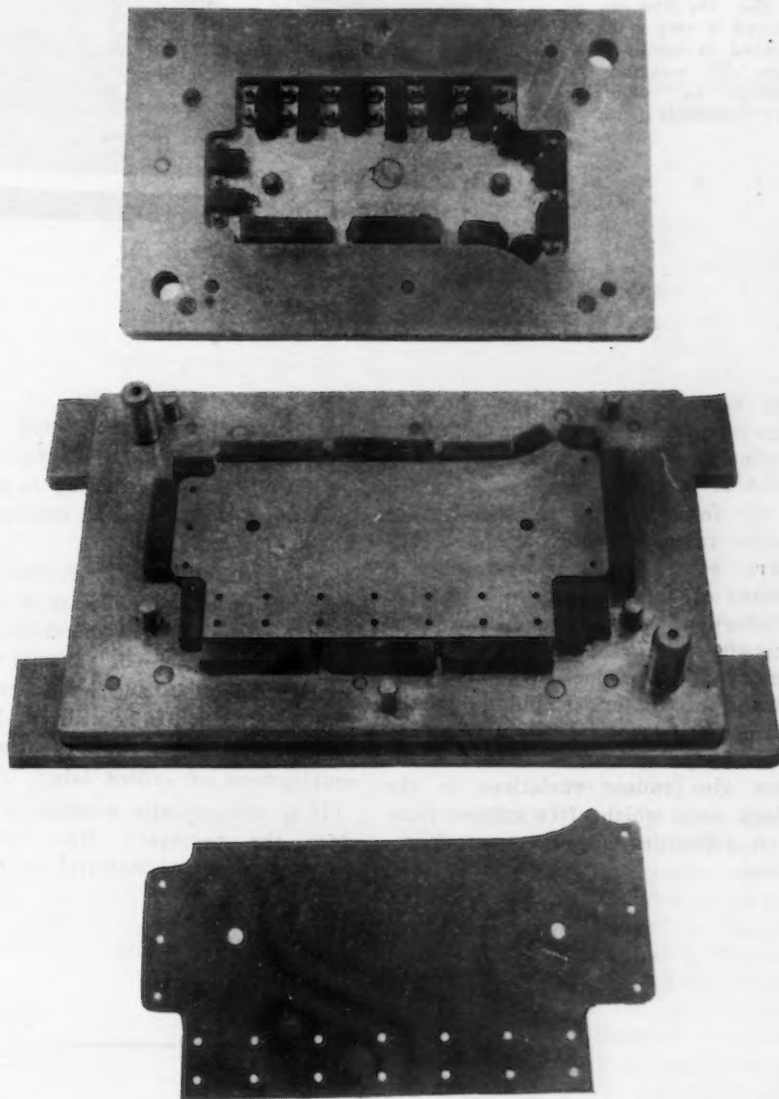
Blank and pierce die. Tests results with this tool were so satisfactory that other dies of this type are being manufactured.
